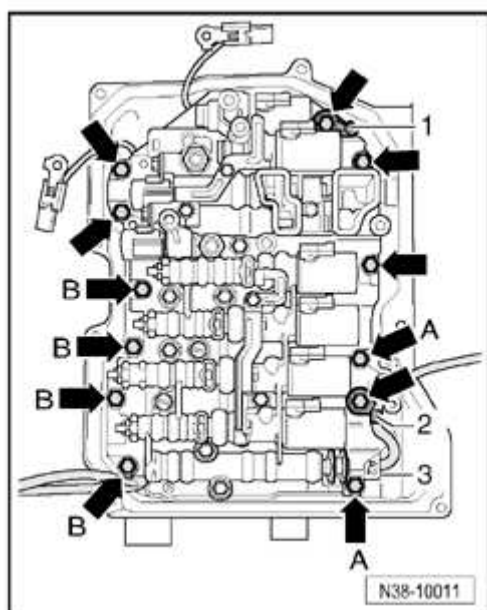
Identifying Valve Body Bolts To Be Loosened
